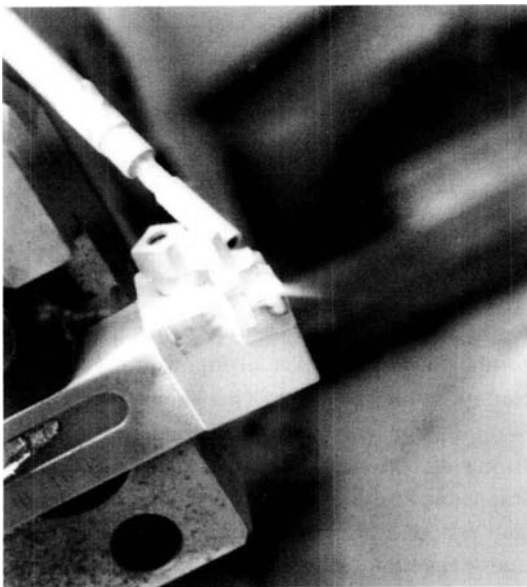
A photo of the nozzle tool assembly showing liquid nitrogen flowing
